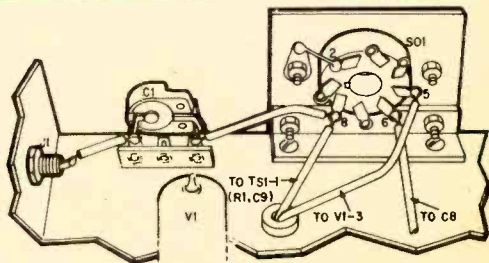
View of top rear of chassis shows how trimmer capacitor C1 and socket for coils are mounted. Cut holes in back of cabinet for access.
